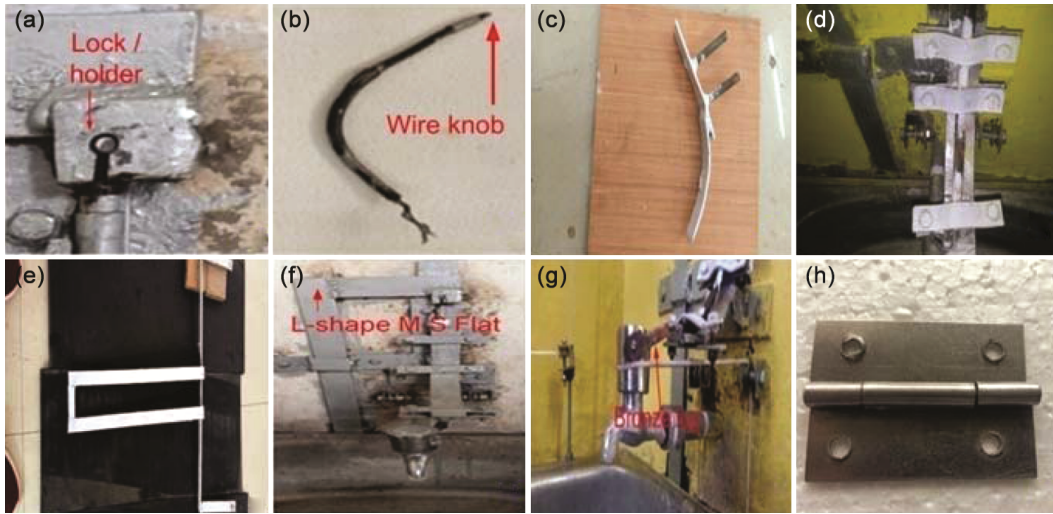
a) Lock/holder for clutch wire, b) Clutch wire, c) Stand for Clutch wire, d) Mild steel flat for holding clutch, e) Stand for supporting cotton rope, f) L-Shape mild steel flat, g) Bronze lug, and h) Hinge.
